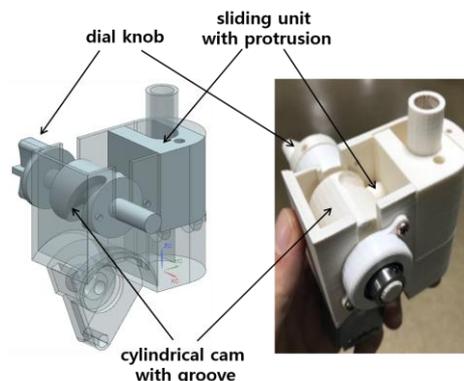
3D modeling of the final assembled housing with the driving units and its fabricated shape
